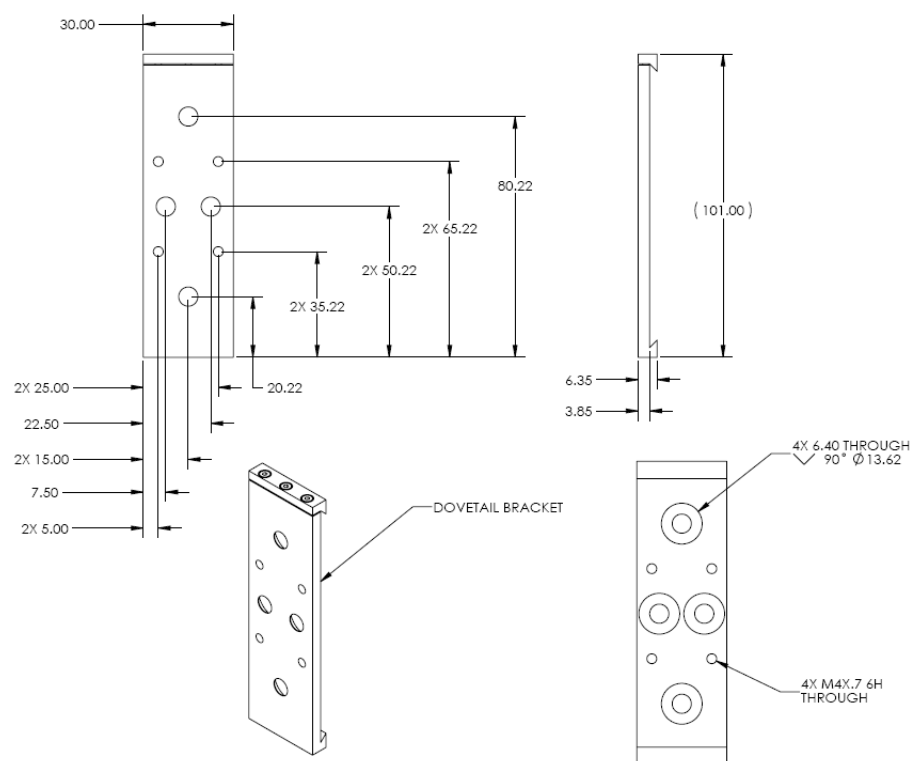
HG-CH Interface Unit Mounting Hardware, Dovetail Clamp (in mm)
